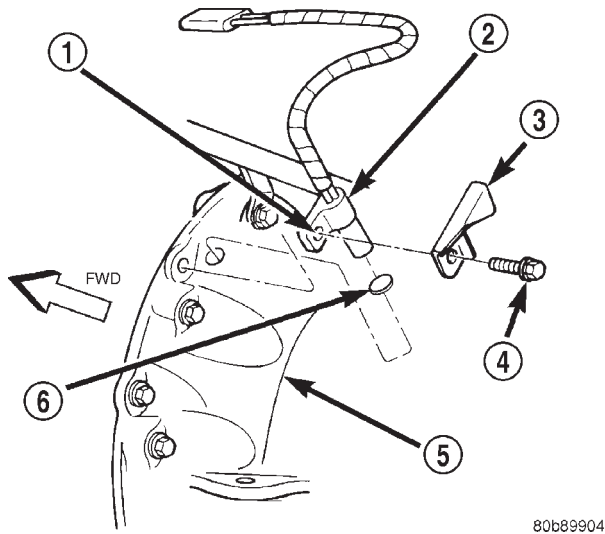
CKP Sensor—4.0L 6-Cylinder Engine
